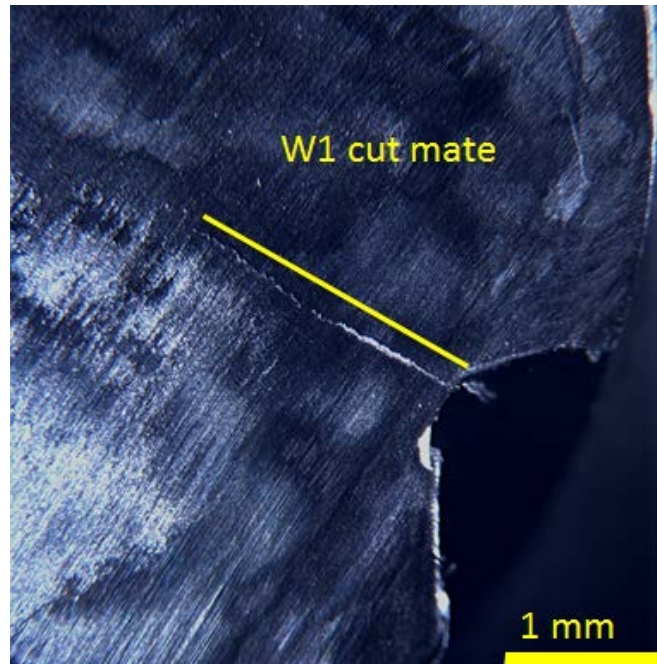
The failed W1 specimen in X52 welded steel series.
